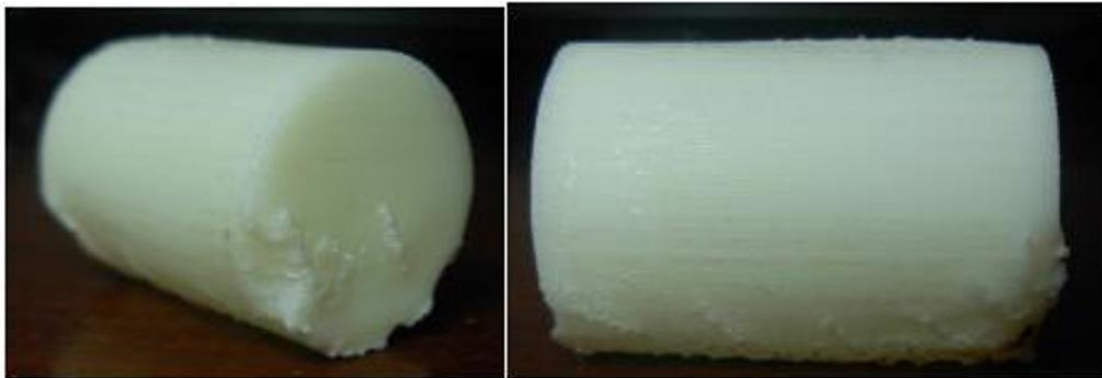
Cylindrical specimens obtained with sliding direction along the x-axis
